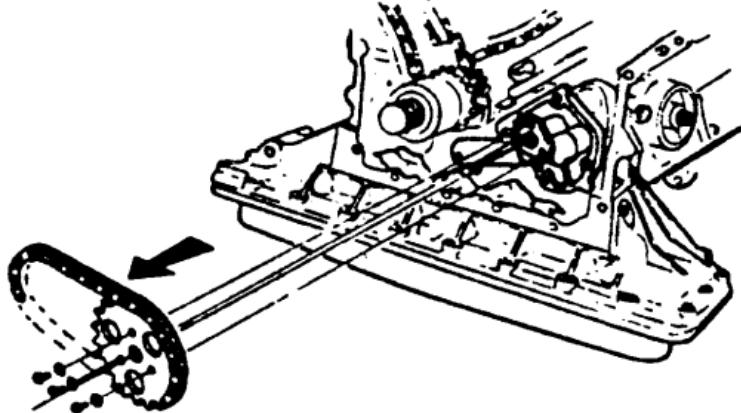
Removing the oil pump drive sprocket and chain
